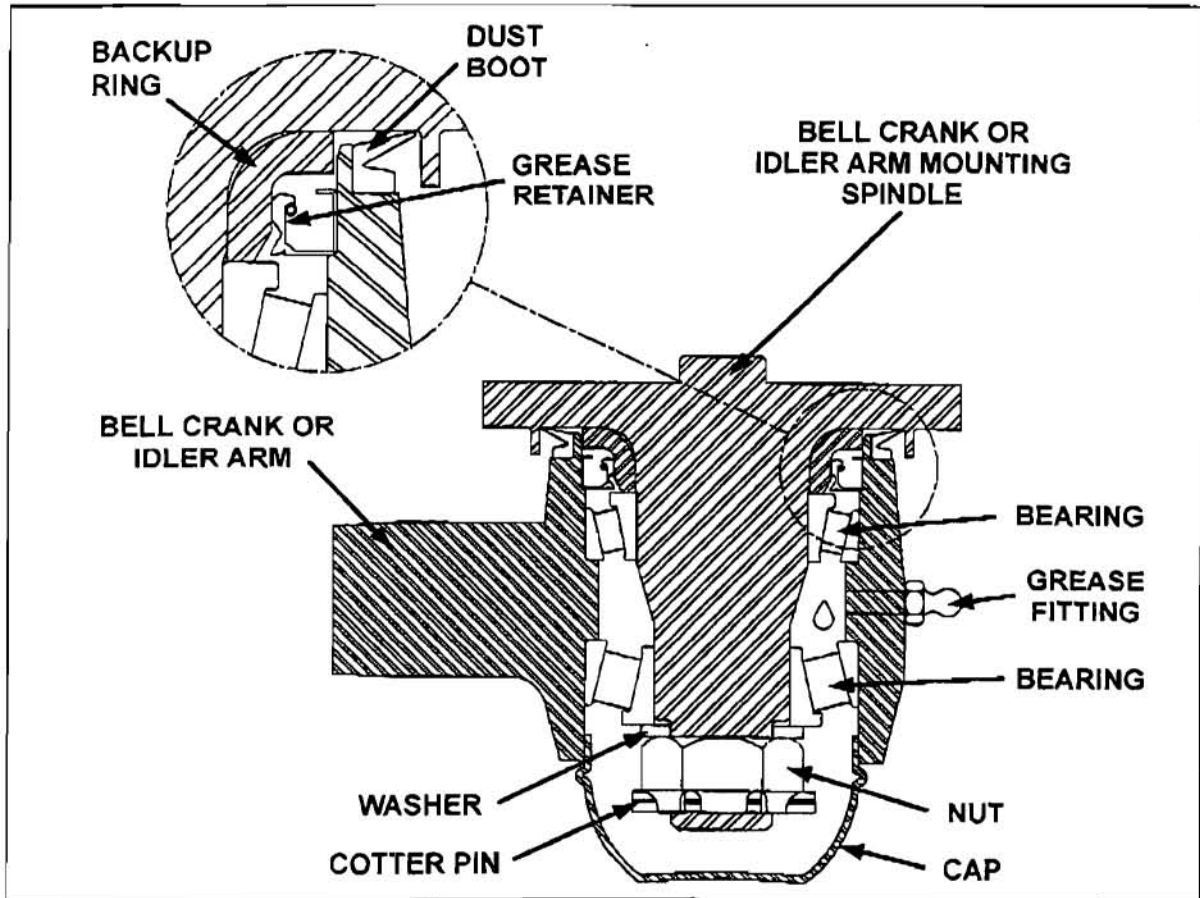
BELL CRANK OR IDLER ARM MOUNTING SPINDLE INSTALLATION
